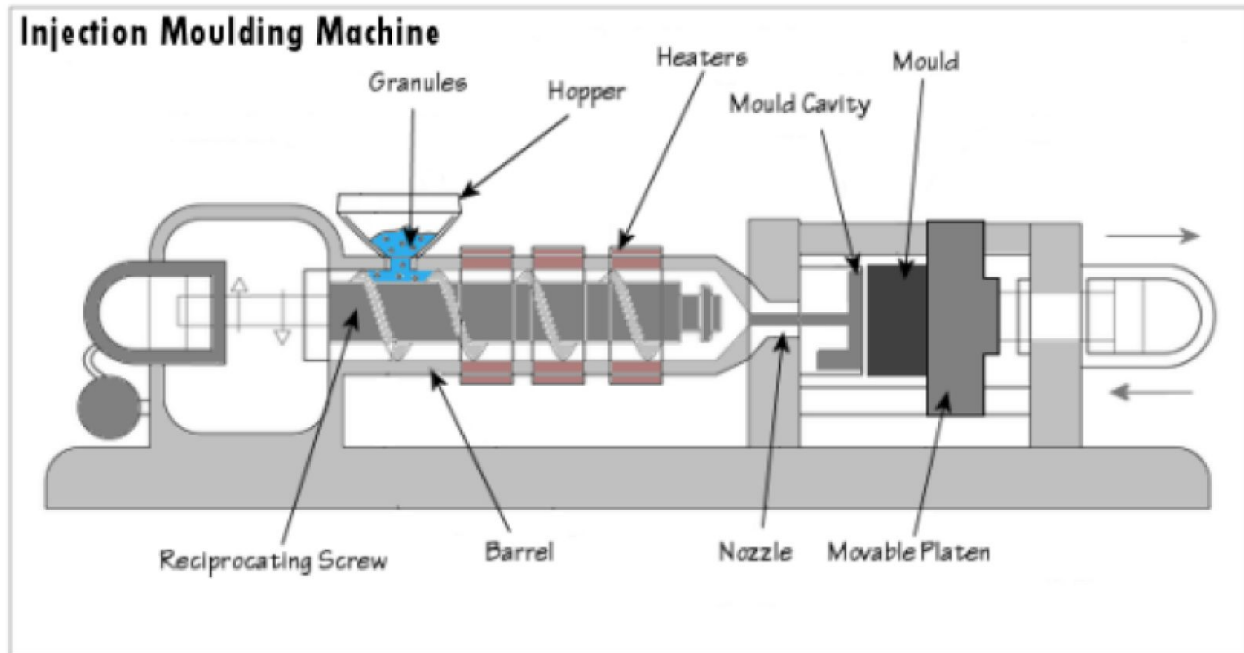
Injection Molding Machine (Source: “Engineerstudent”)
